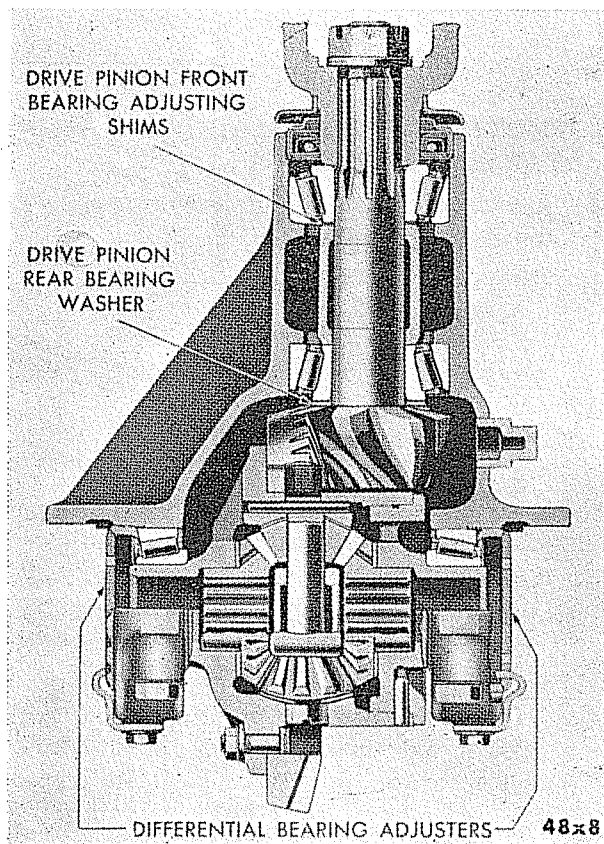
Rear Axle Differential (Assembled View) 1-08A
